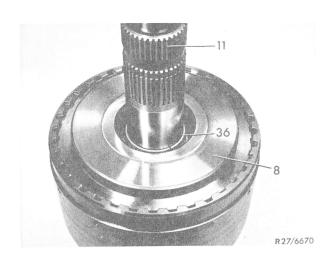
8 Supporting flange K 2 36 Radial bearing 11 Hollow shaft
